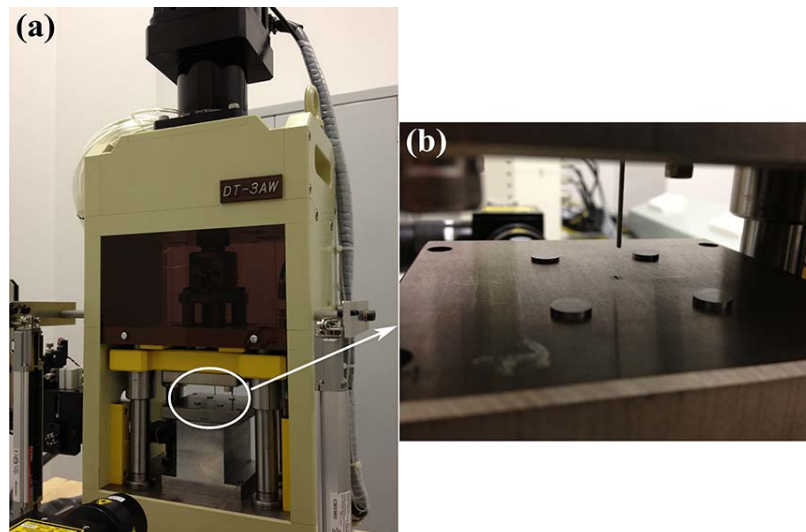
Micro V-bending set (b) in Desk-top servo press machine DT-3AW (a).
